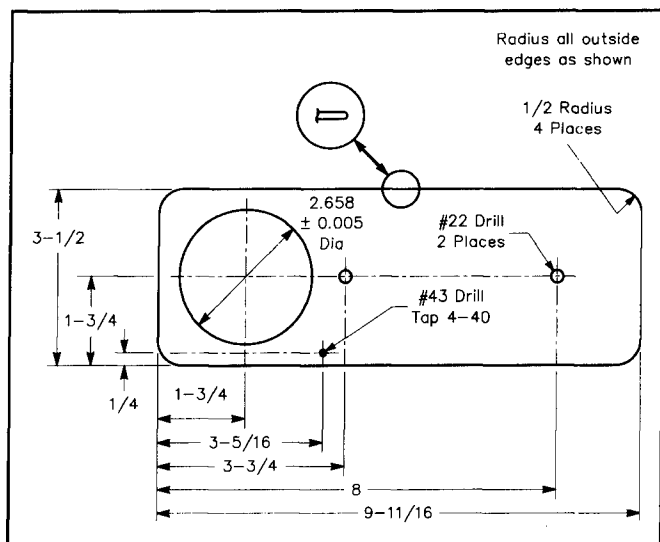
Plate line of the single 3CX800A7 amplifier. Except as noted on the drawing, dimensions are $\pm 1/32$ in. Material is 1/16-in. copper or brass. Anode hole is sized for the EIMAC 720829 collet. Dull-finish (nickle-less) silver plating is recommended after the collet is soldered in place.
